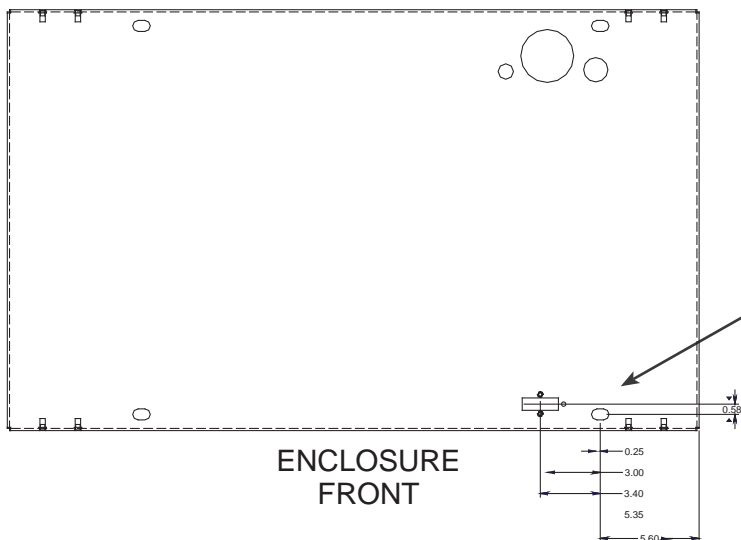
, Installation Location of Pad Shear/Magnet Assembly (Dimensions in inches)
